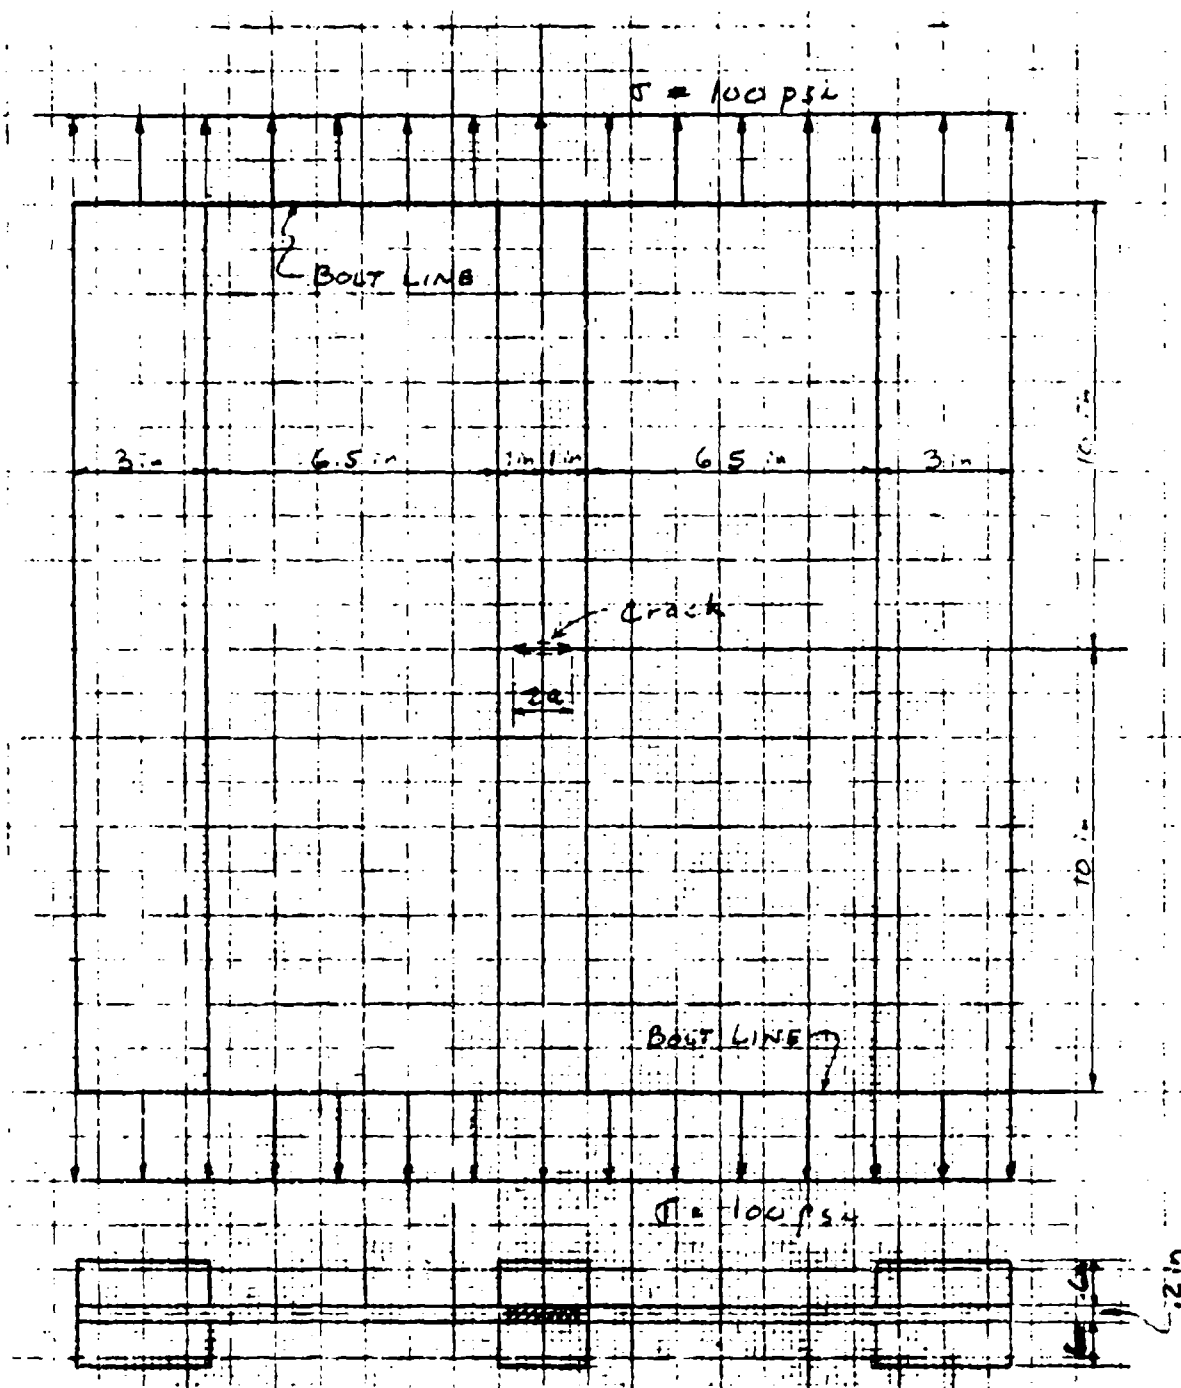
IDEALIZED FAIL-SAFE INTEGRAL LOWER PLATE
